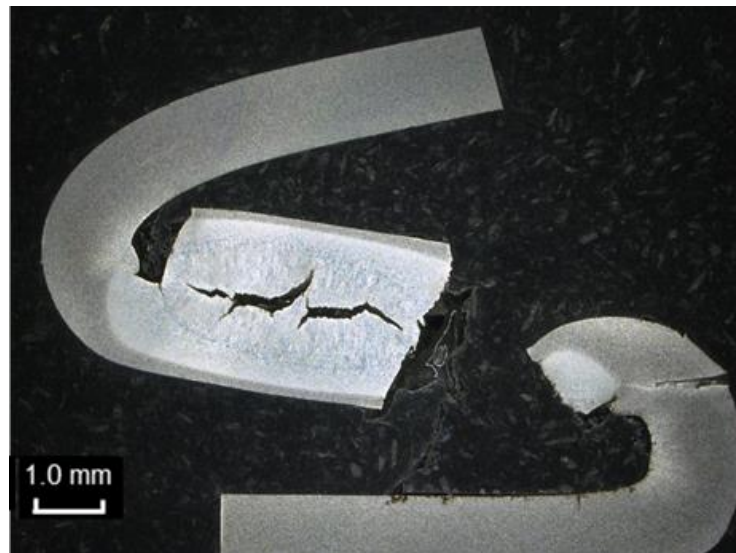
Photo of Fatigue crack of as weld under shearing load mode ( $N_f = 54517$  cycles).
